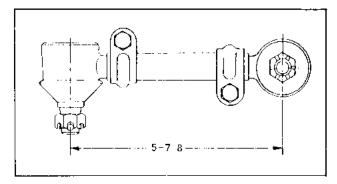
F-74. Tie Rod Adjustment - 3 Wheel Models
